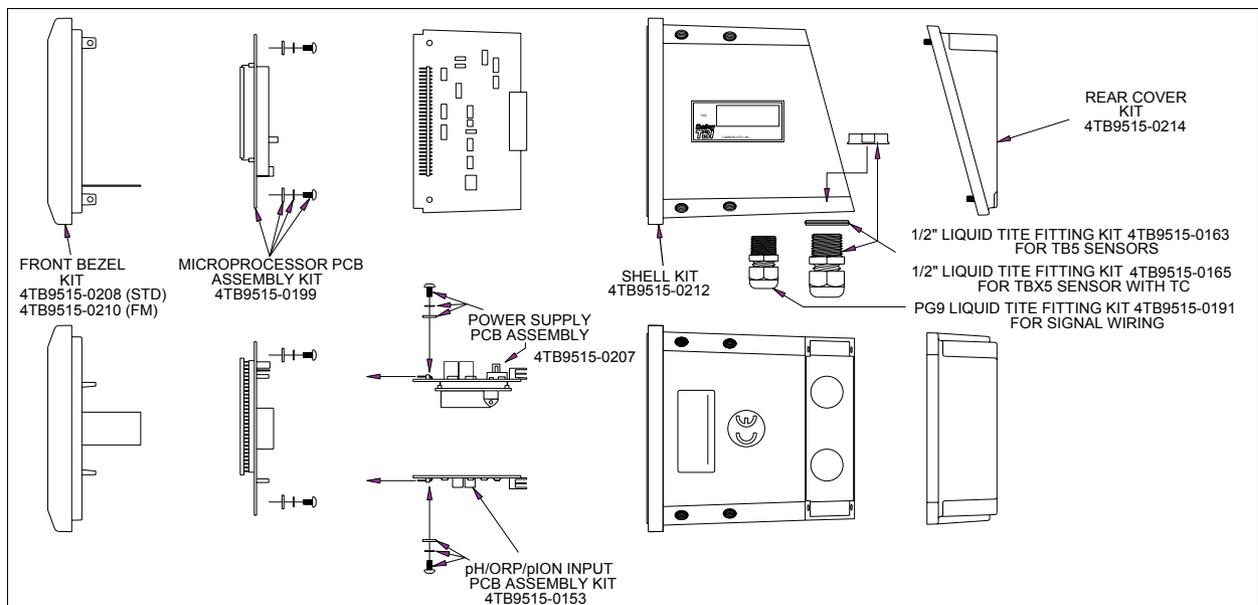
TB84PH Advantage Series Exploded View Showing Kit Assignments.
